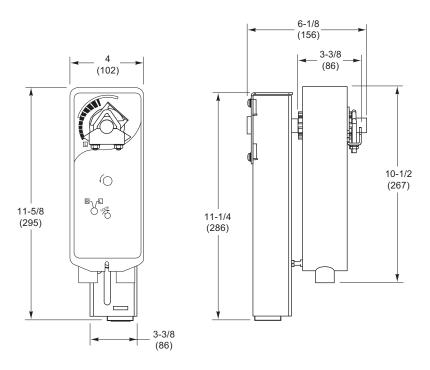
Mx41-715x or Mx41-707x Linked Actuator Assembly With AV-602 Linkage.
